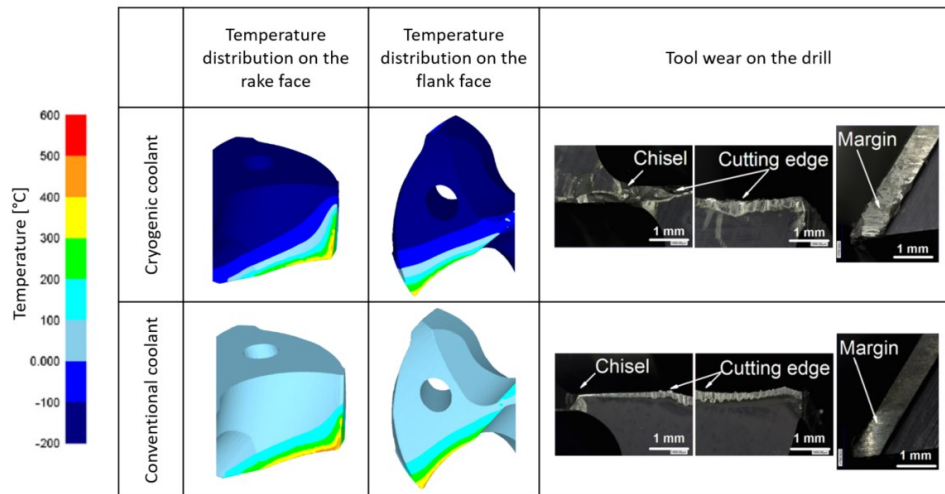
Temperature distribution on rake as well flank face and tool wear of drills under cryogenic and conventional through-the-tool cooling. Revisited from (Outeiro et al., 2015)
